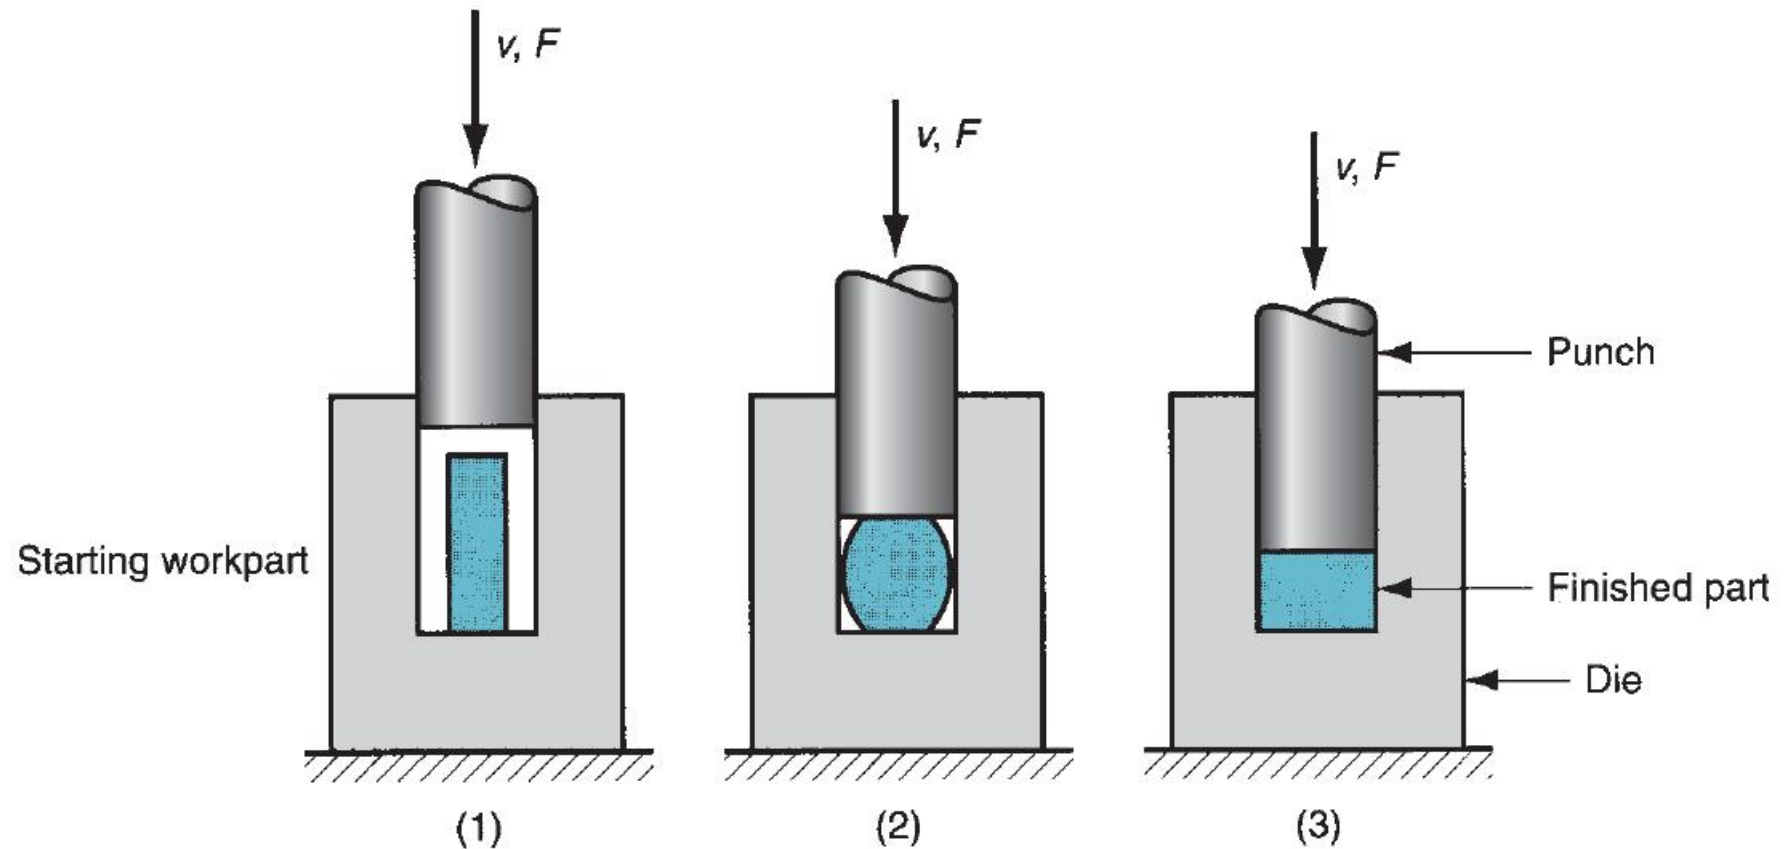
Flashless forging: (1) just before initial contact with workpiece, (2) partial compression, and (3) final punch and die closure.
